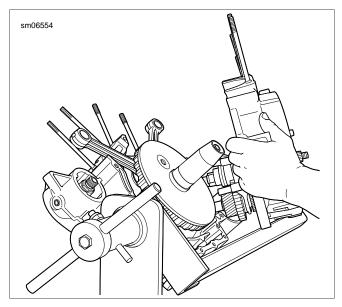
Assembling Crankcases with Crankshaft Guide Tool (Part No. HD-42326-B)
